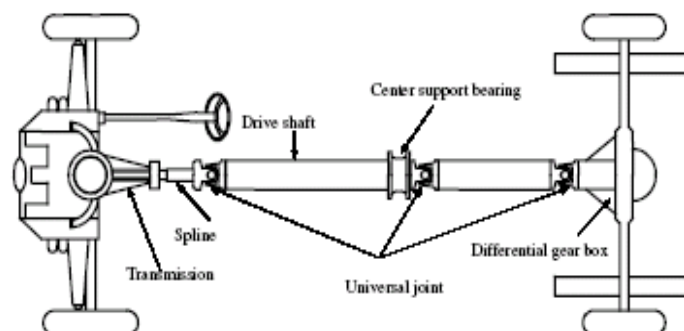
Conventional two-piece drive shaft arrangement for rear wheel vehicle driving system
